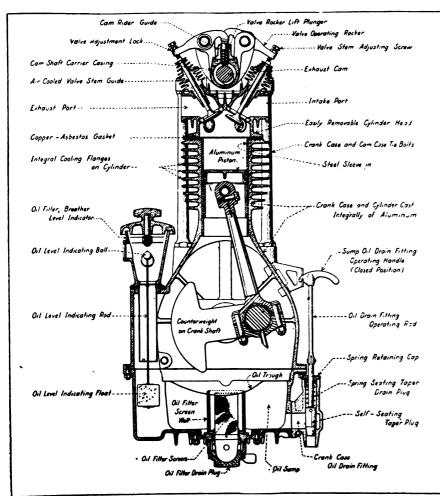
Cross-section of the Page four-cylinder air-cooled engine.
